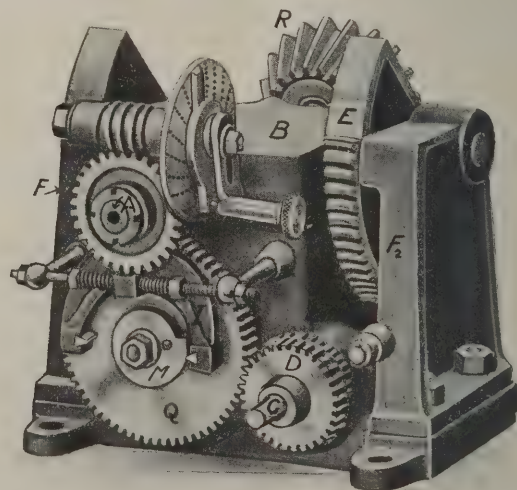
Prof. Kroll's Bevel Gear Shaping Attachment.
